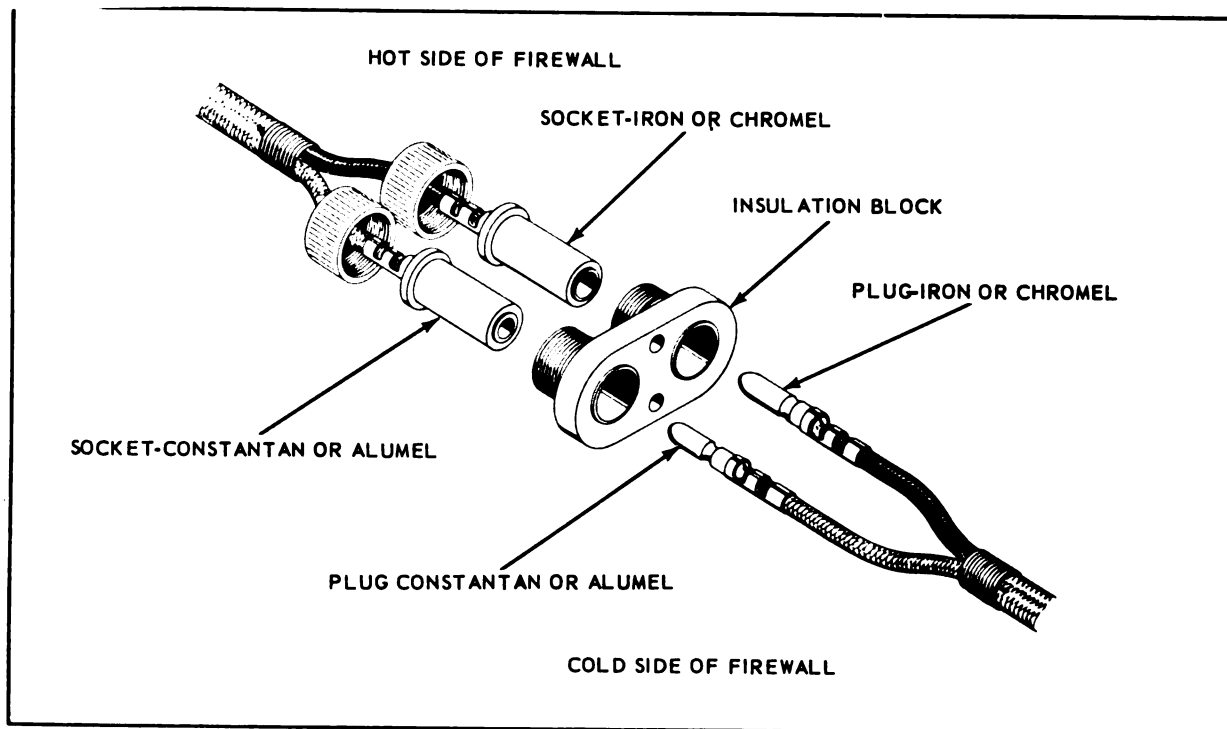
Thermocouple Connector Assembly (AN5537)
